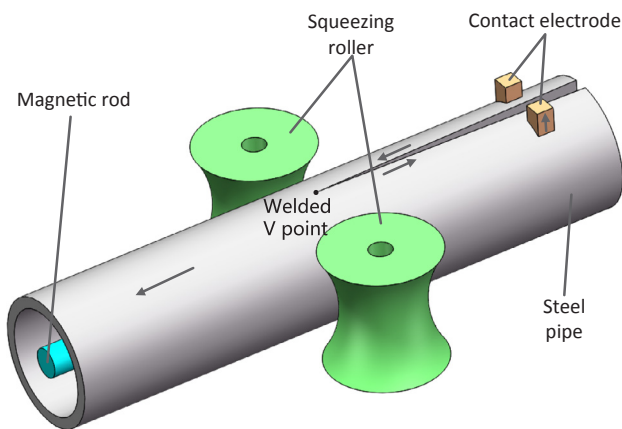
Schematic diagram of the production process for contact welded pipe.
